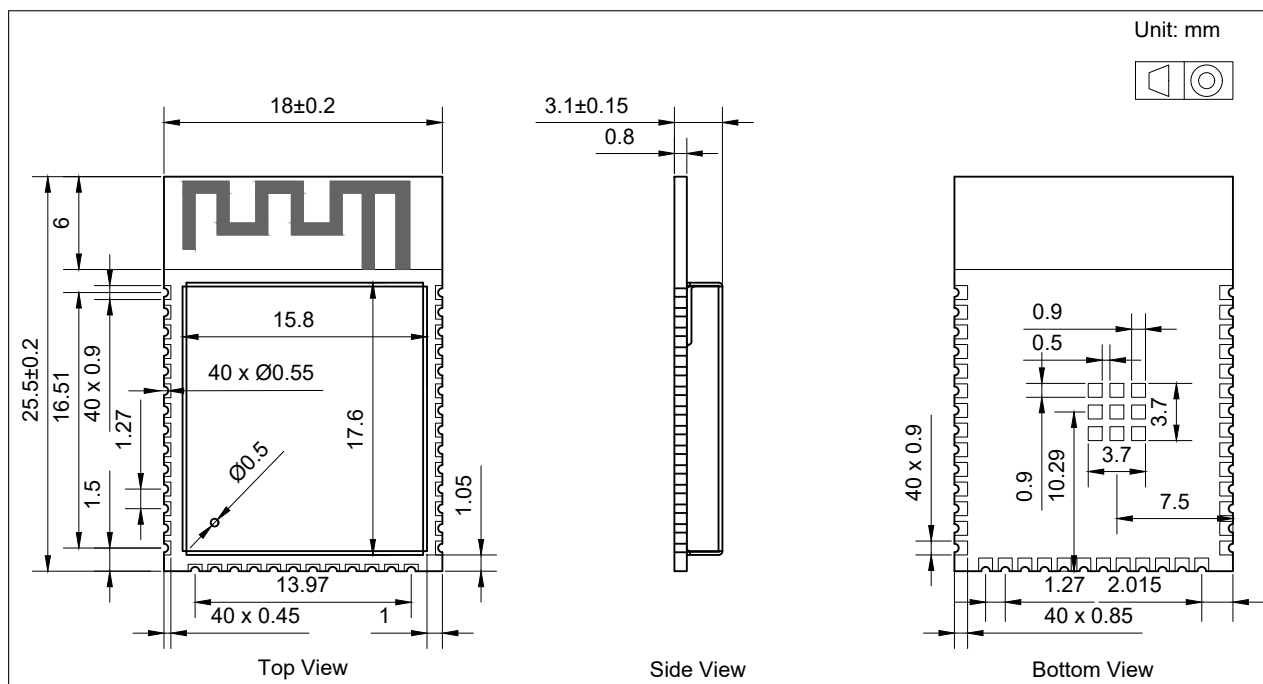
ESP32-S3-WROOM-1 Physical Dimensions
